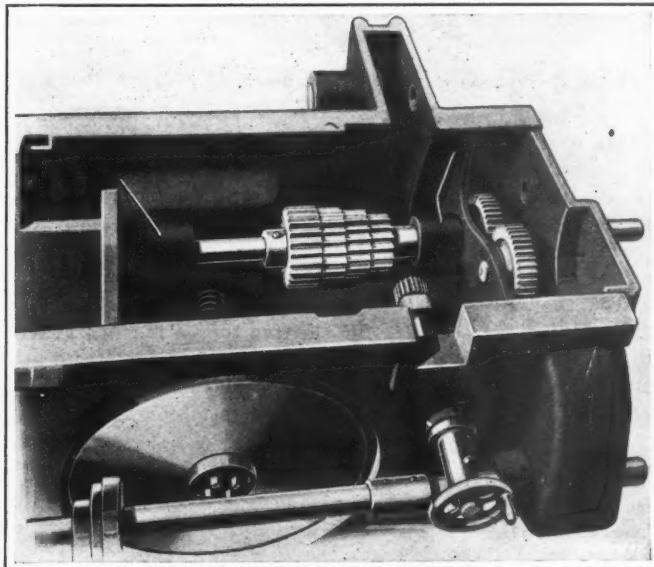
View of Mechanism in Bed with Cover removed—Attention is called to Oil Pipes leading to Bearings
